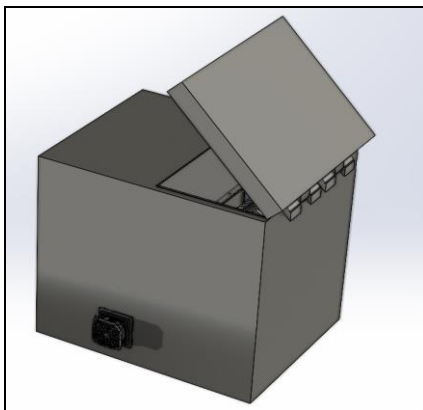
External view of the compact machine, showing the arrangement of the hopper and the exhaust gas outlet
